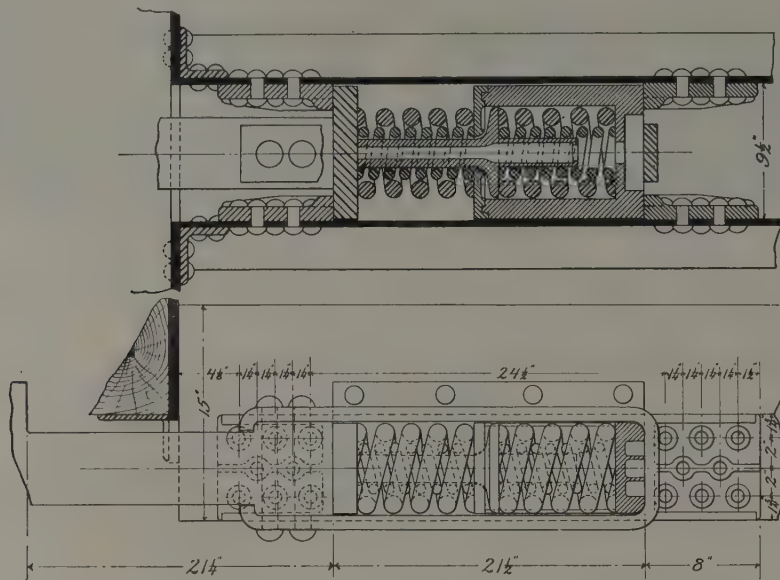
Butler Special Tandem Spring Draft Gear, Butler Drawbar Attachment Company.
